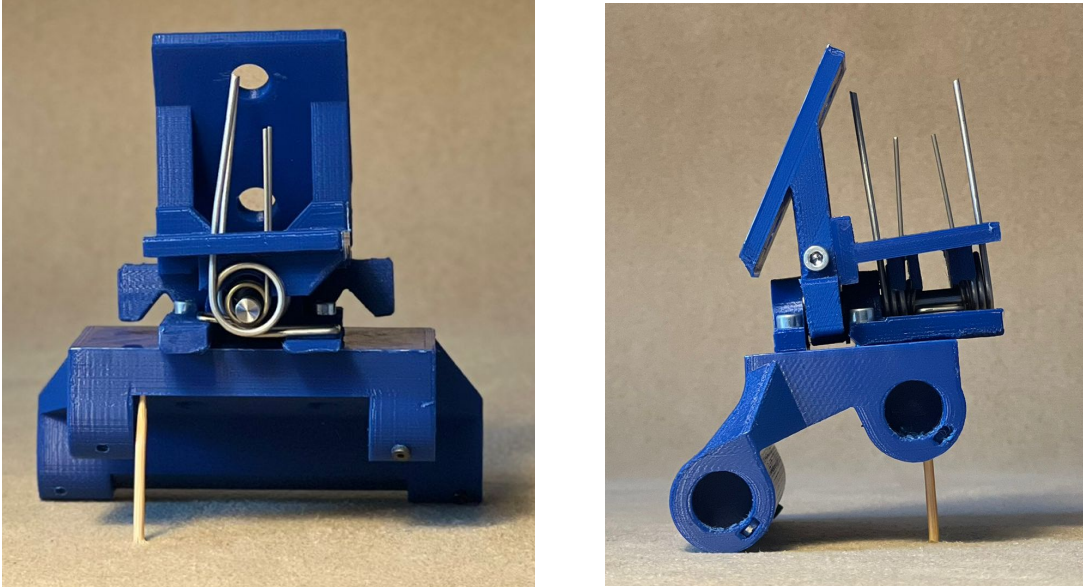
Front and side views of the 3D printed prototype. The toothpick is used to raise the front height to match de CAD views in section 3.4. Left : front view (frontal plane); right : side view (sagittal plane).
